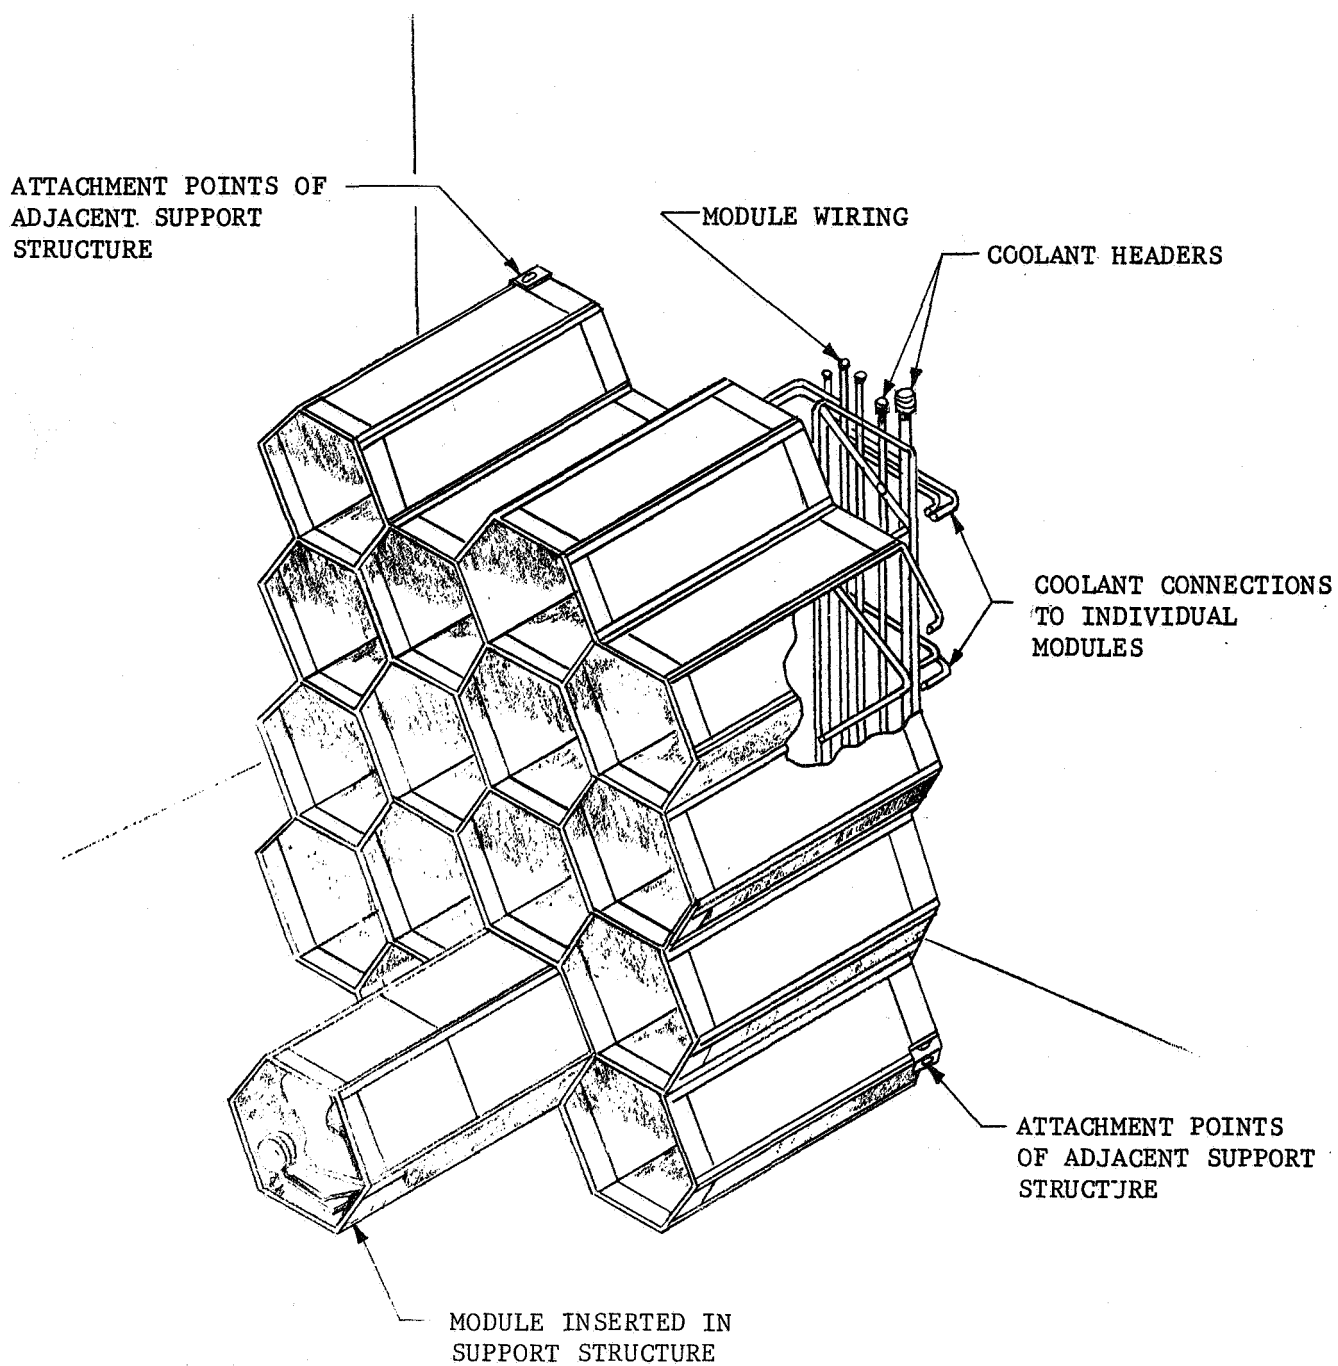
, 5 KW Xe LAMP SEALED MODULE ARRAY ASSEMBLY
